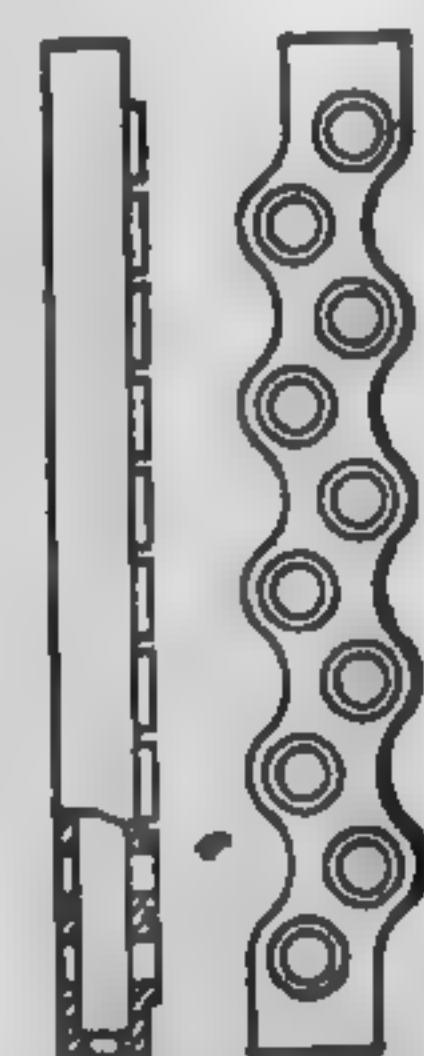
Details of Header — B. & W. Boiler. (Inclined Header.)
